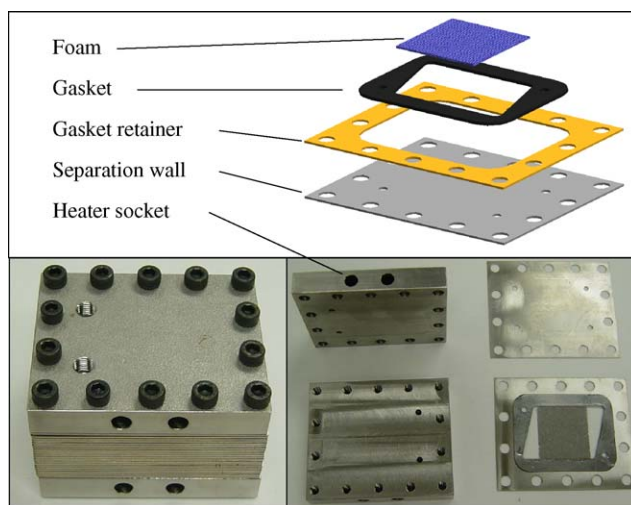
Clockwise from top: exploded view of the repeating layer structure showing individual microreactor components; photograph of the fabricated components, including the cover plates with cartridge heater sockets; an assembled reactor module comprising 25 layers (overall dimensions 80 mm \times 70 mm \times 60 mm).
